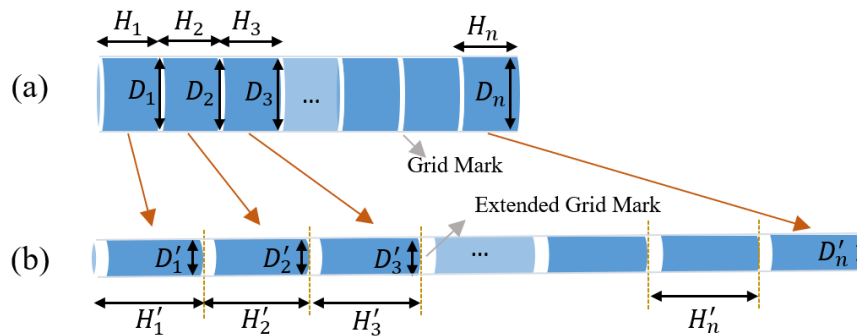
Schematic of measurements before die-drawing (a) and after die-drawing (b).
